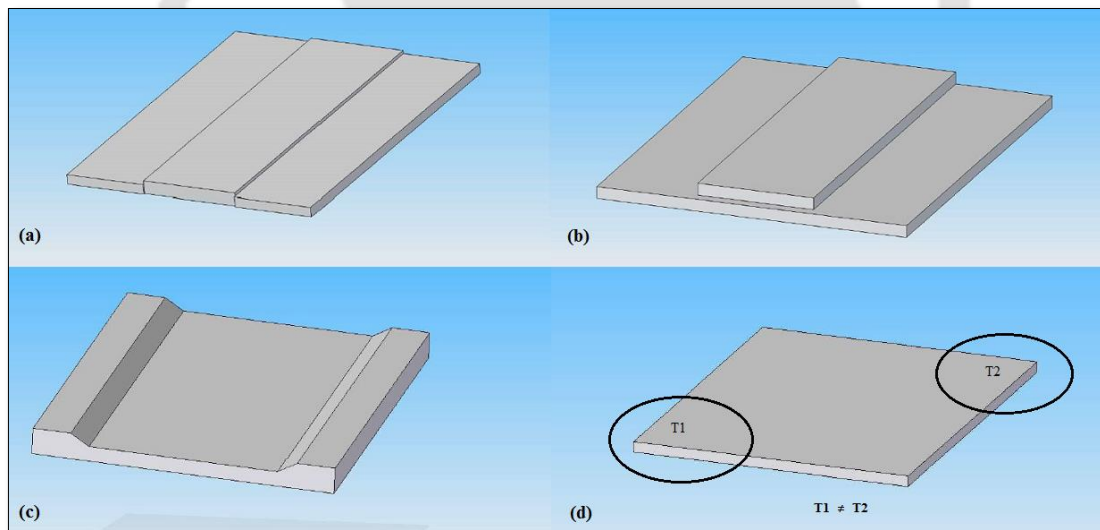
Types of tailor blanks (a) Tailor Welded Blanks, (b) Patchwork Blanks, (c) Tailor Rolled Blanks and, (d) Tailor Heat Treated Blanks.
